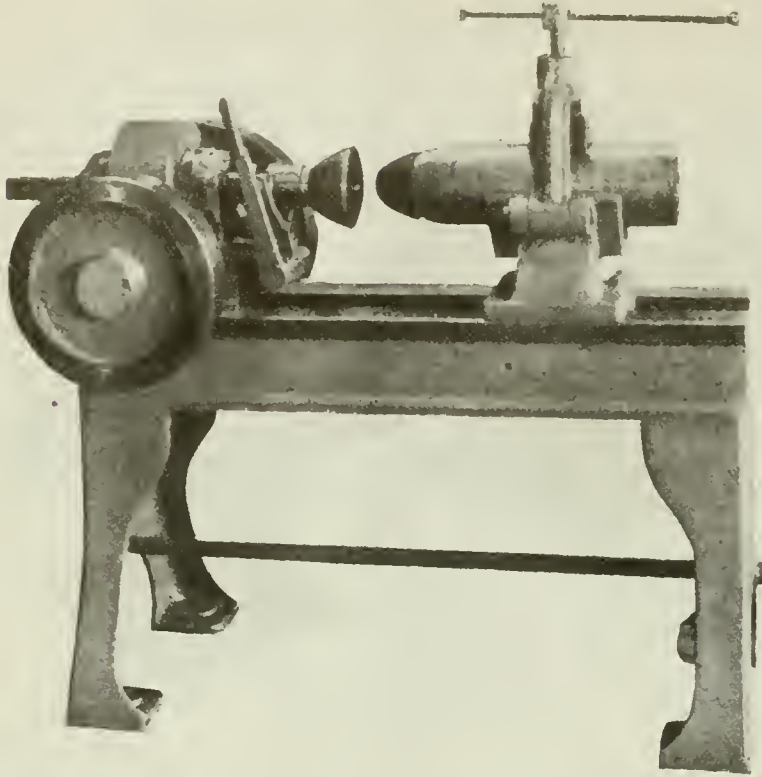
SHELL NOSE TIGHTENING MACHINE.
